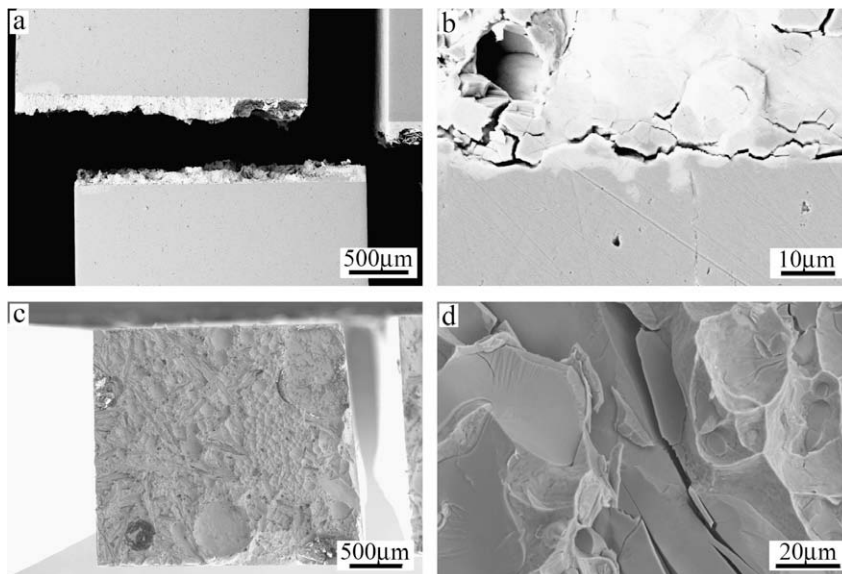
Tensile fracture morphologies of SnCu/Cu joint with thin solder: (a) and (b) cross-section of the fracture; (c) and (d) the top view of fracture surface.
